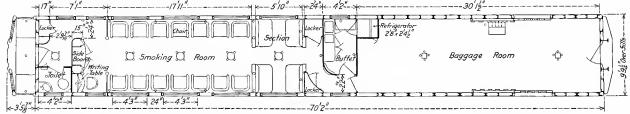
Floor Plan of Western Pacific Baggage, Parlor and Library Car Shown in Fig. 170.
